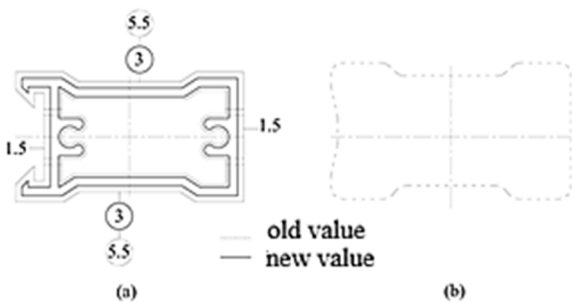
(a) Bearing length drawing (b) the last width of aluminum
